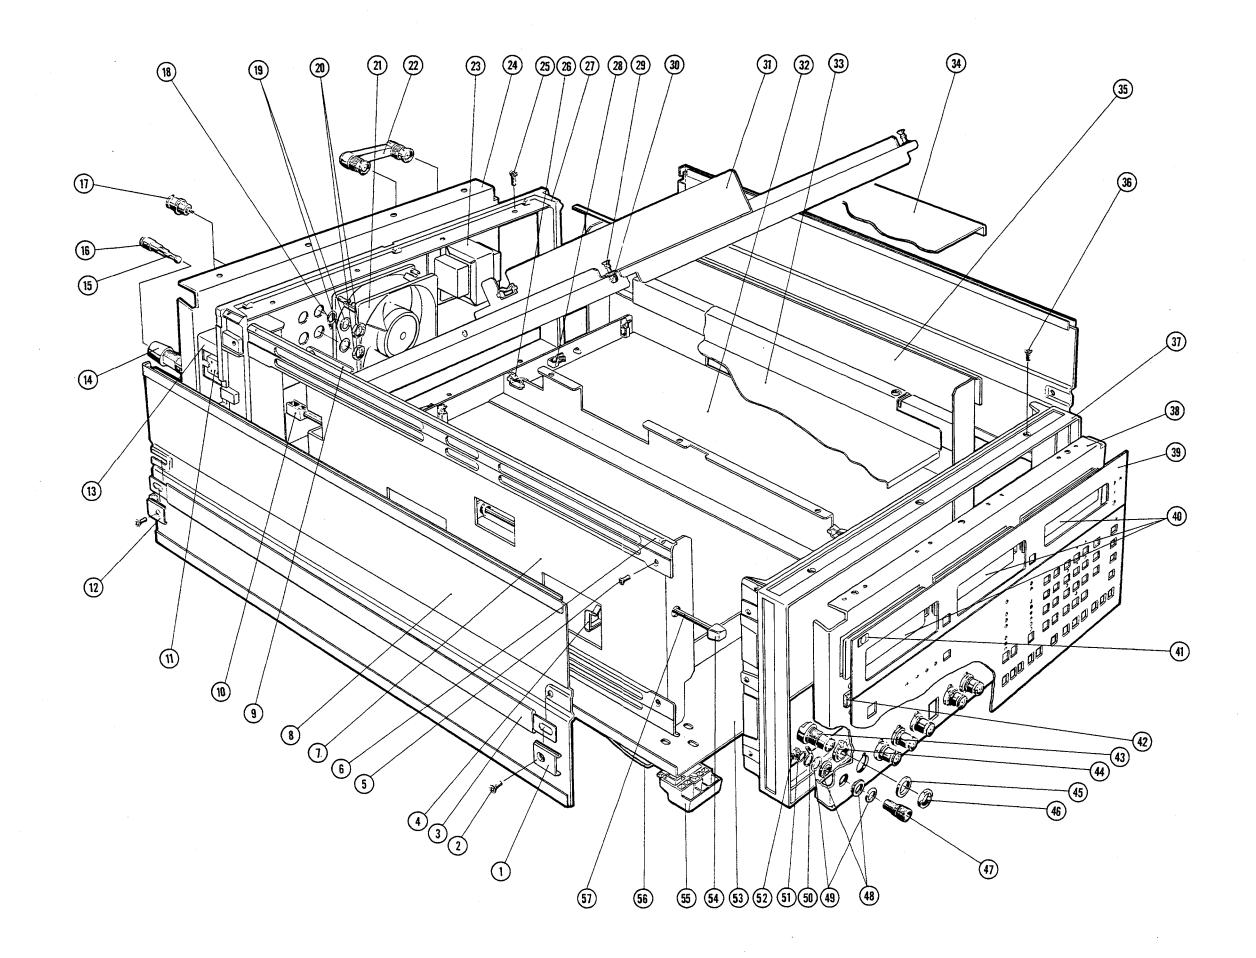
Major Mechanical Parts on the Instrument Exterior — Exploded View.
